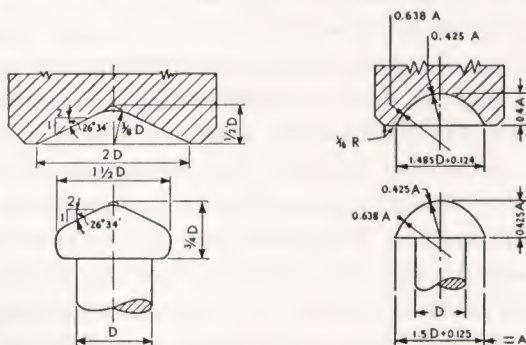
(left). Nominal dimensions of cone-point head and rivet set.
